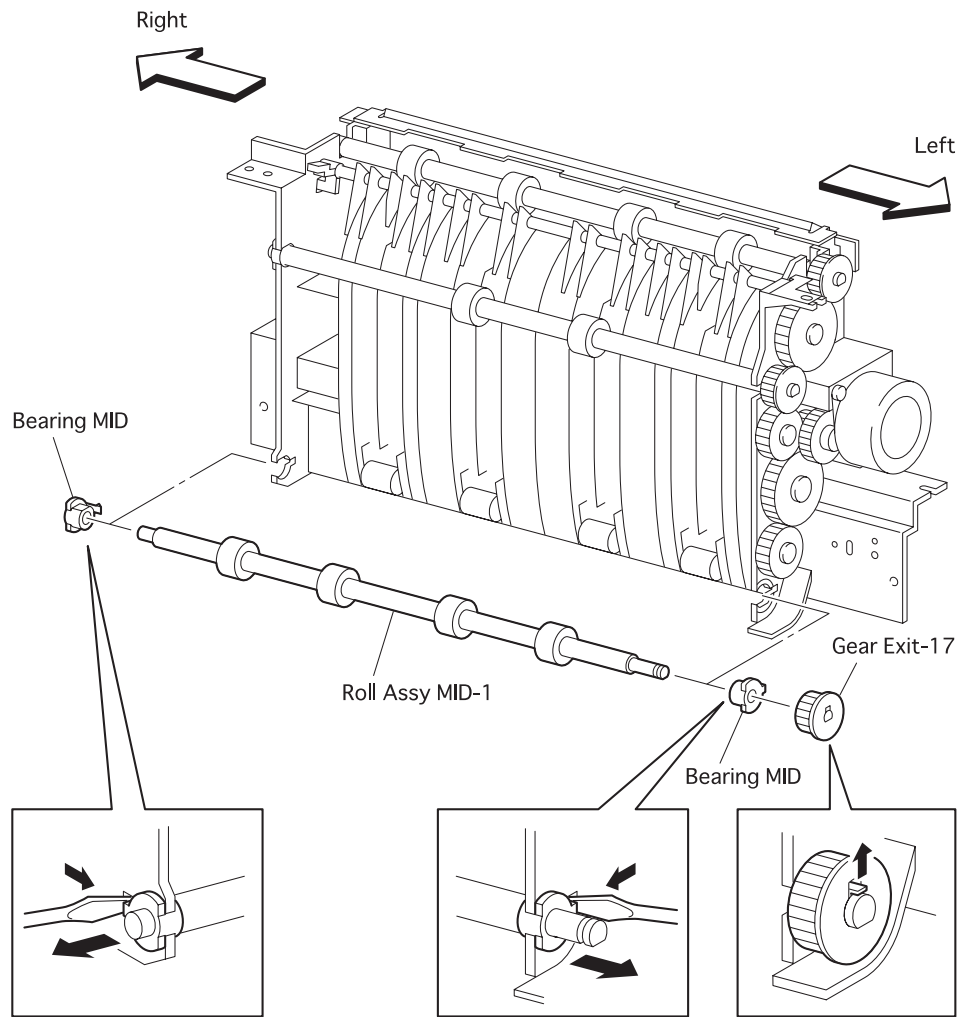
Bearing Exit ,Bearing MID and Roll Assy MID-1 Removal(1)
